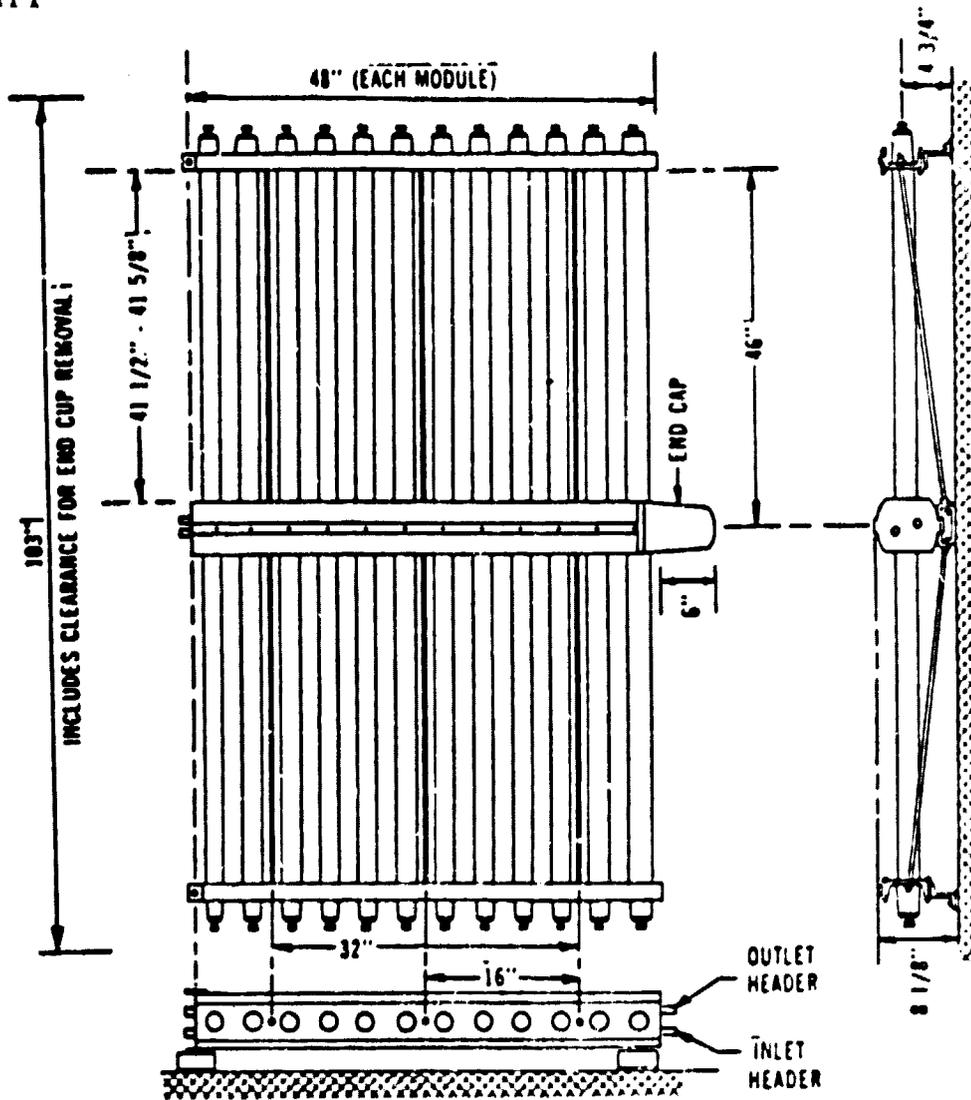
Drawing of SUNPAKTM Solar Collector Module.
